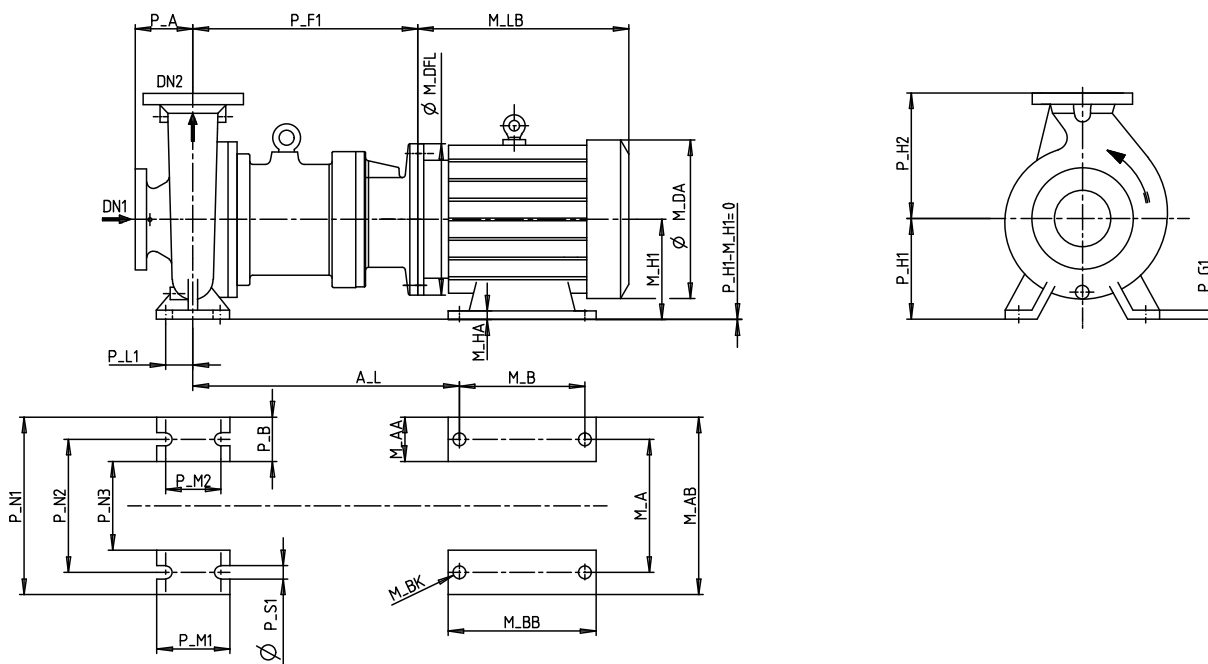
Dimensions for installation on pump feet and motor feet $P_{H1}-M_{H1} = 0$
